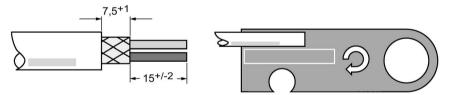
Stripping dimensions for the PROFIBUS DP cable
